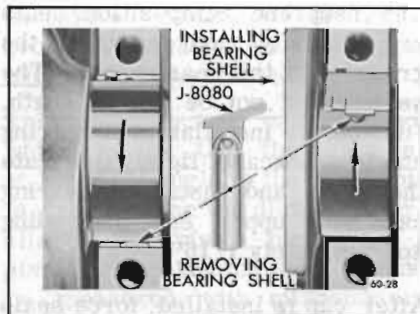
Removing and Installing Crankshaft Bearing Upper Shell
